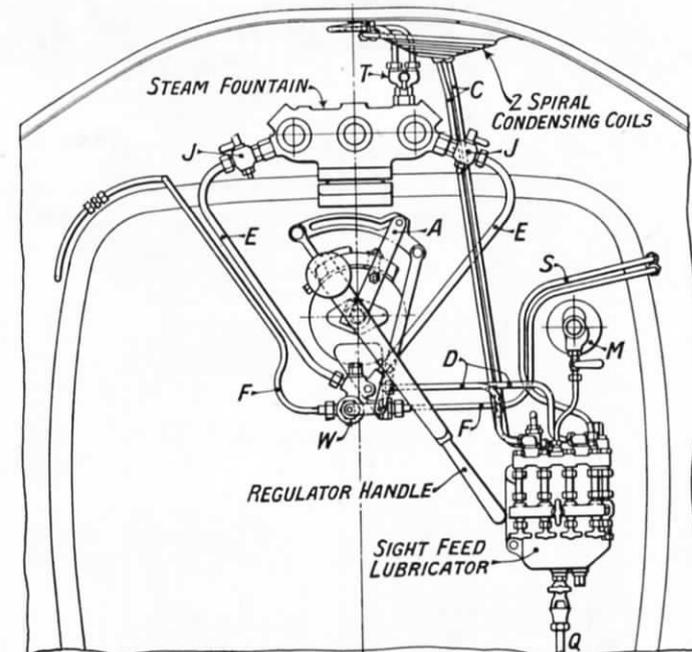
LUBRICATING FITTINGS IN CAB, G.W.R.
